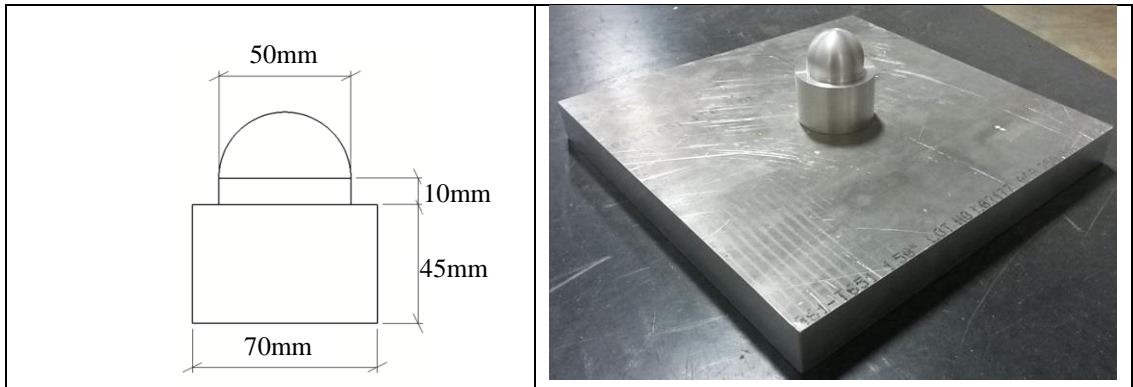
Spherical indenter. (Left) Side view of sphere with dimensions. (Right) Image displaying the spherical indenter mounted to an aluminum plate.
